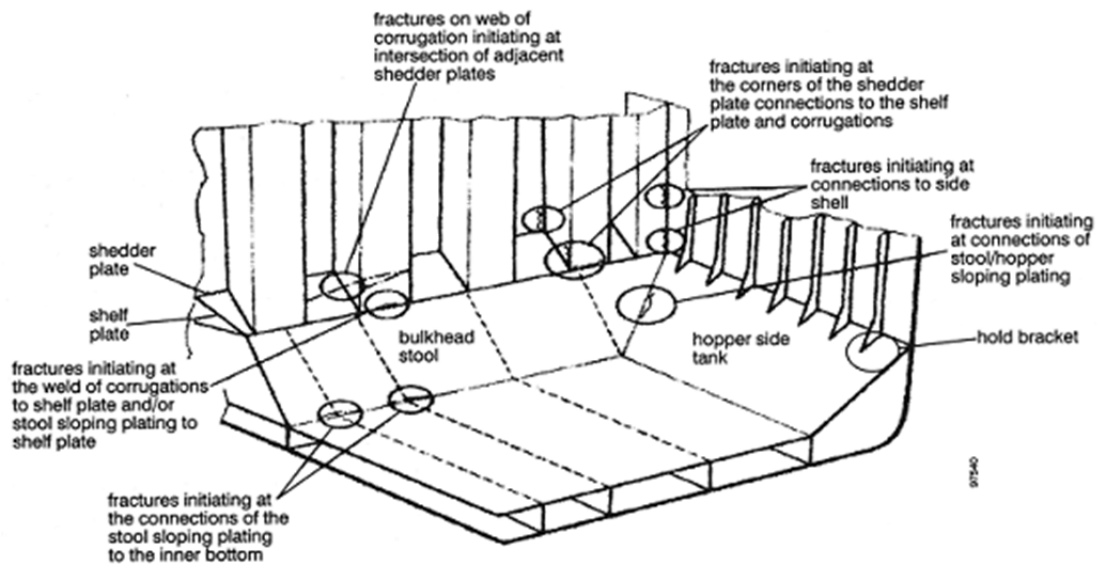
(1) Typical fracturing at the connection of transverse bulkhead structure
